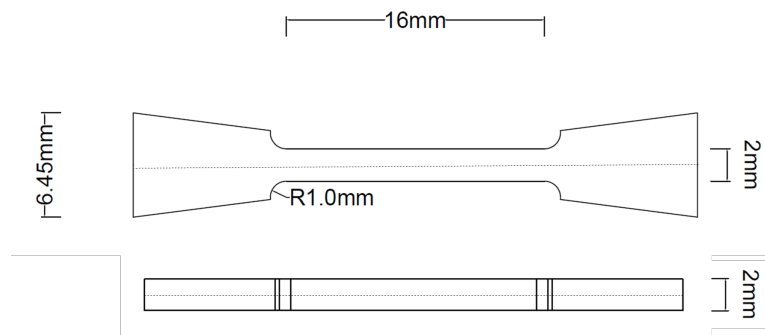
Specimen dimensions for the dog bone shaped coupon.
